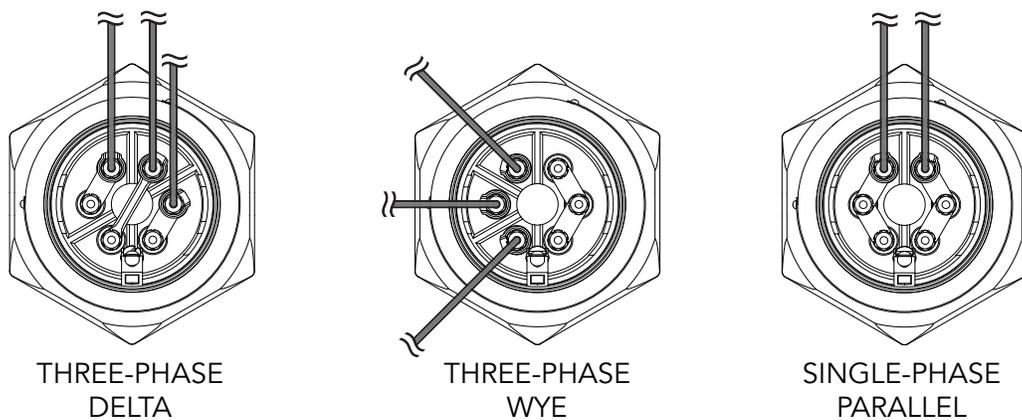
Heating tank element phase configurations. Replacement elements may be a different phase configuration.
